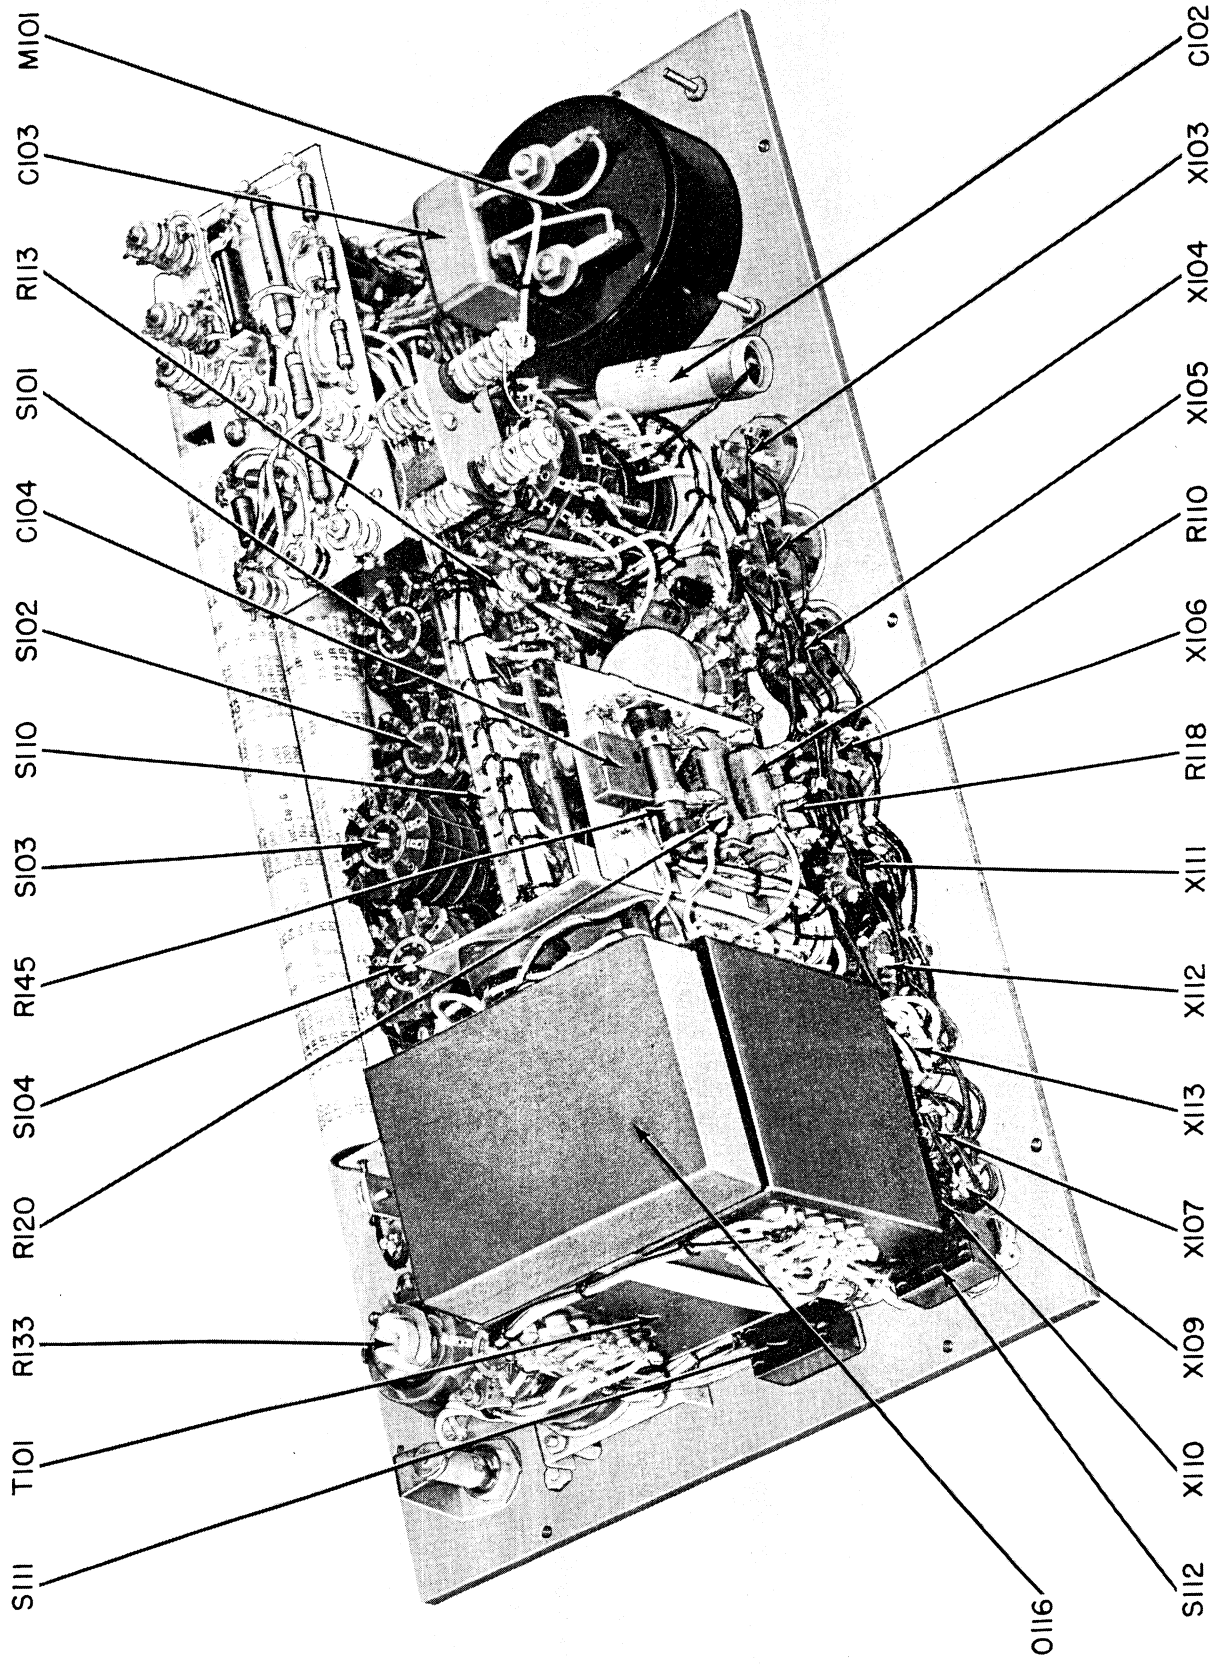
Internal View of Tube Tester TV-3B/U Rear Left Oblique
